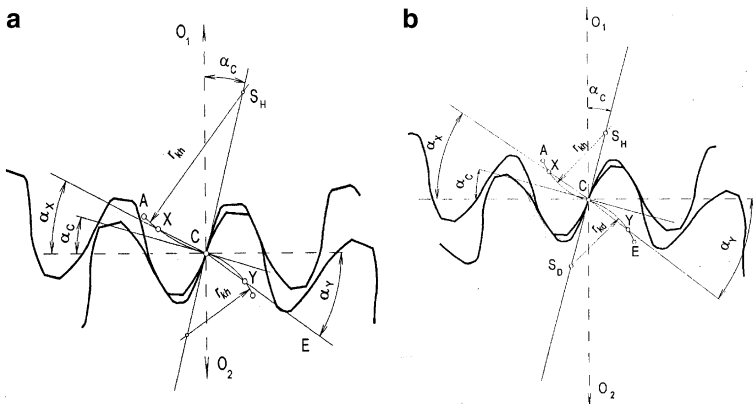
C-C Gearing [3]: (a) non-symmetrical; (b) symmetrical
